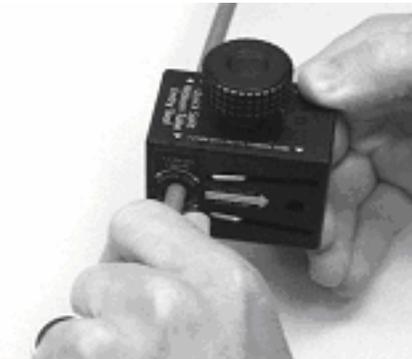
Rotate the tool $\frac{1}{2}$ turn to ring cut the buffer tube.
